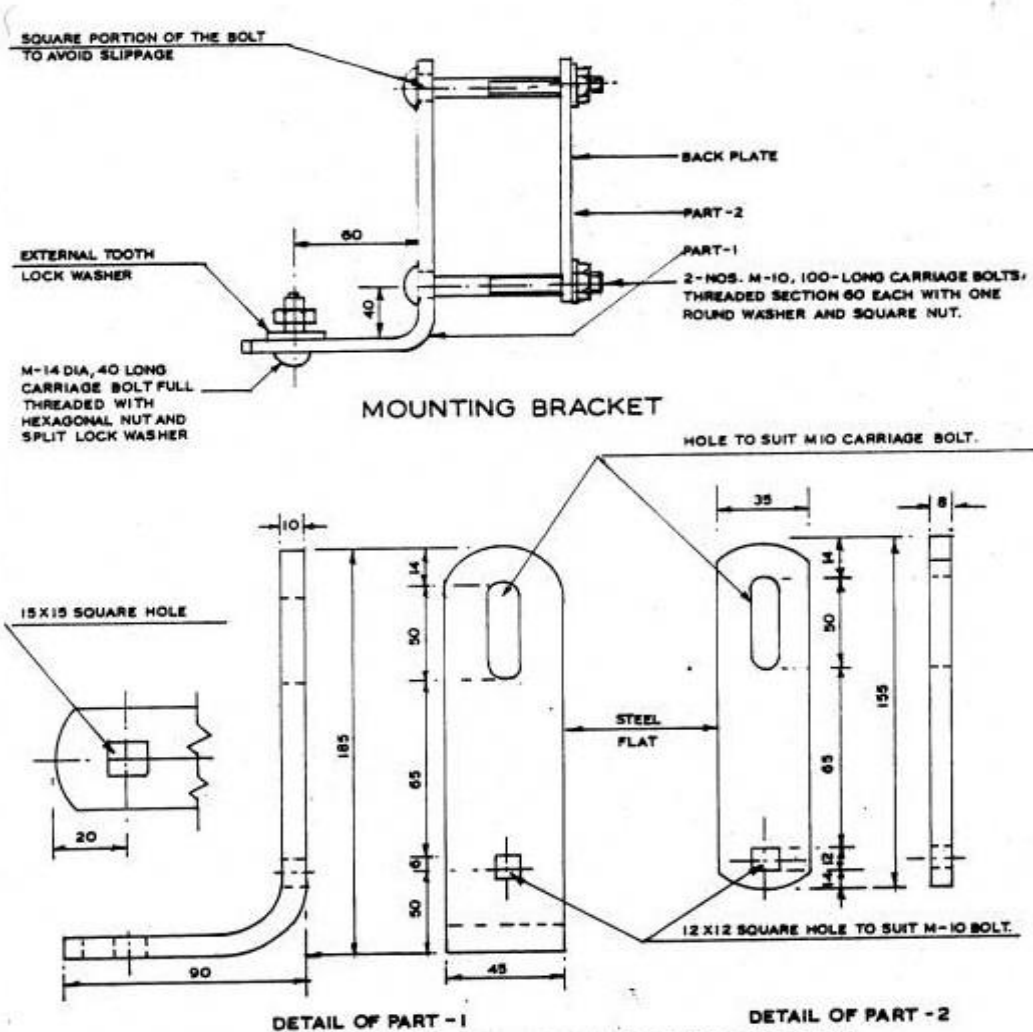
MOUNTING DETAILS OF 11KV FUSE CUTOUT
